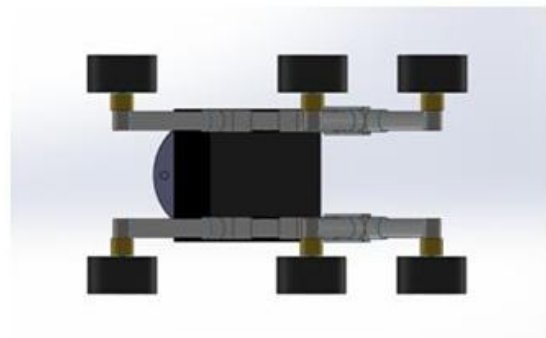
Solid Works Bottom View 3d Models Of Rocker Bogie System
